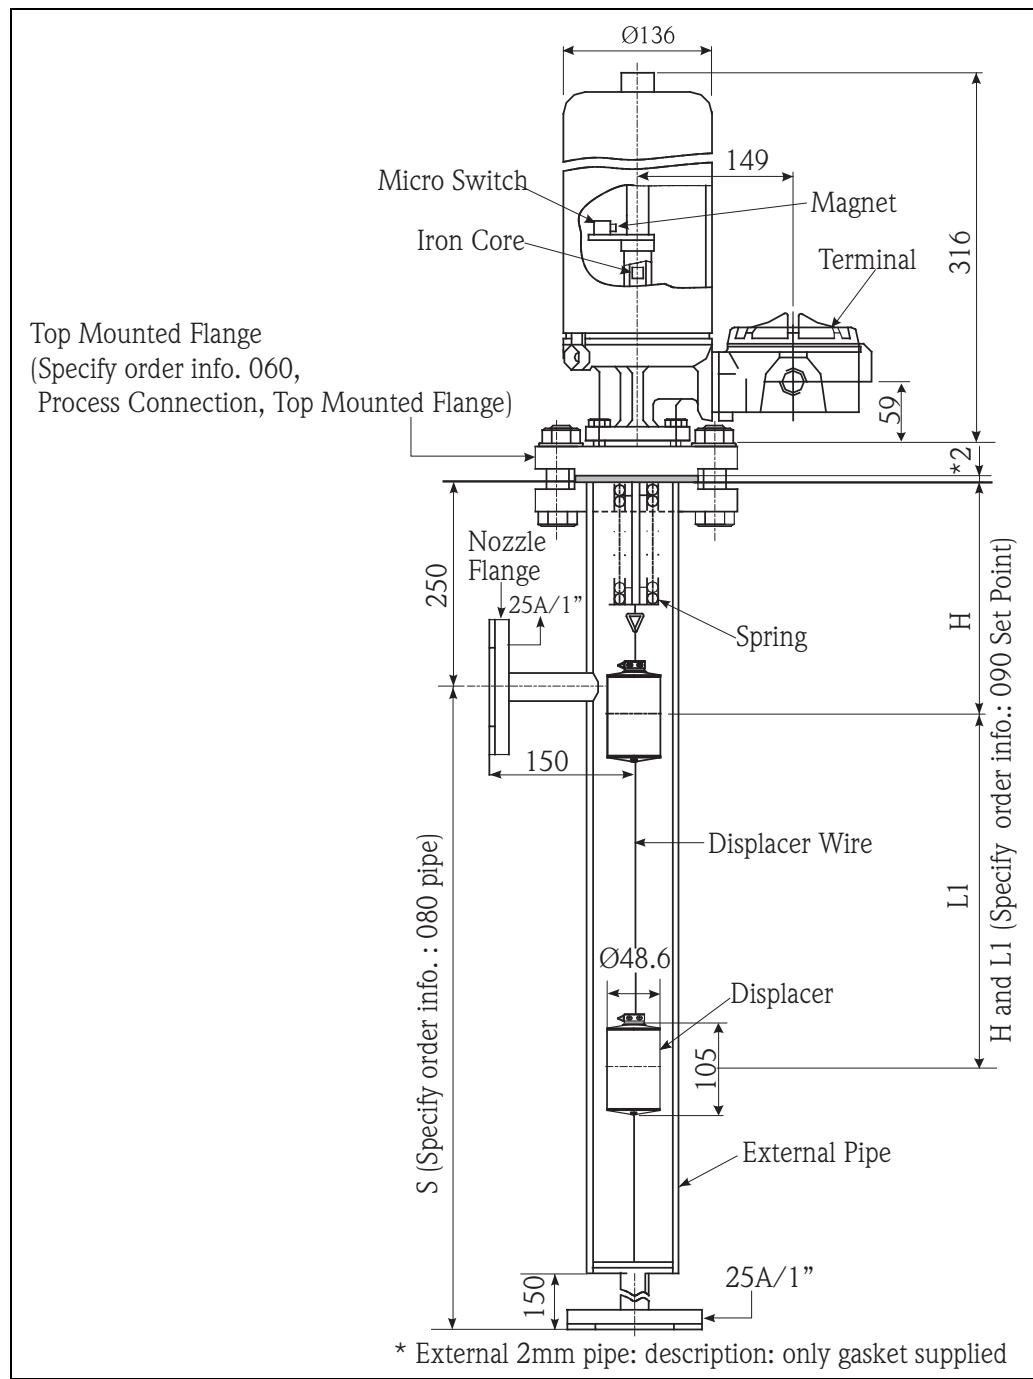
MPC2 with External Pipe (Side-bottom Installation)
